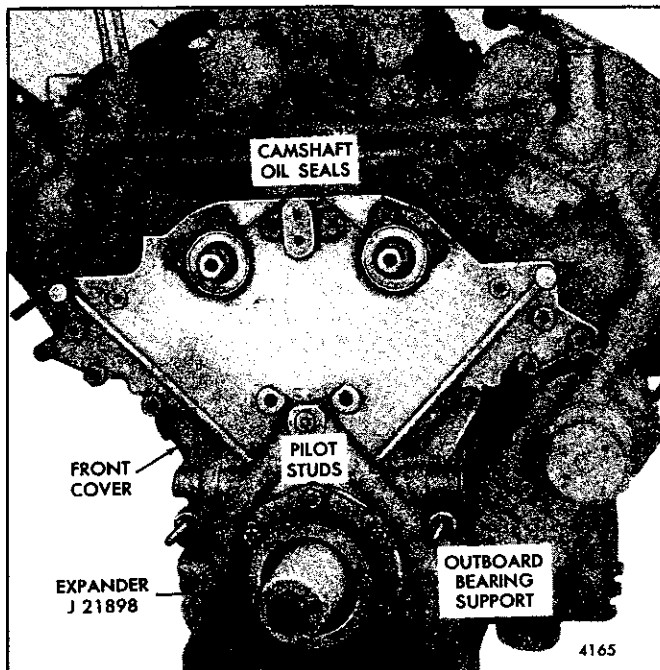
Installing Engine Front Cover - 8V-Engine
